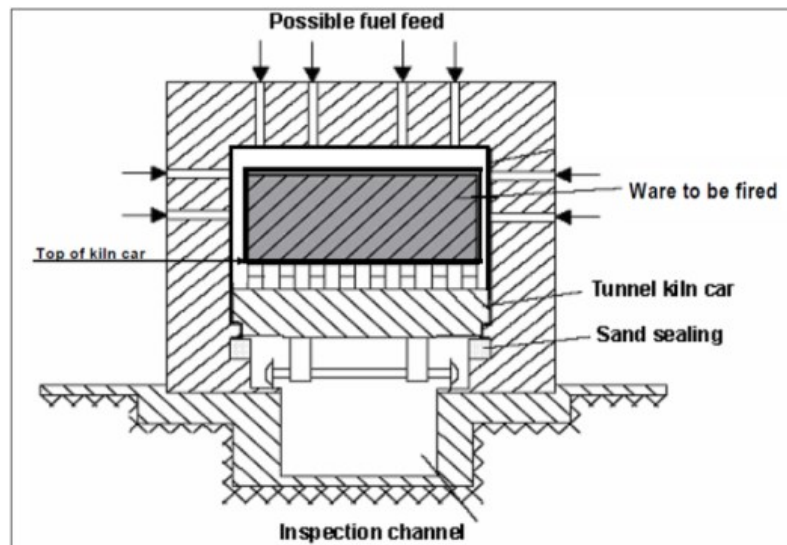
Cross-section of a tunnel kiln with a tunnel kiln car
